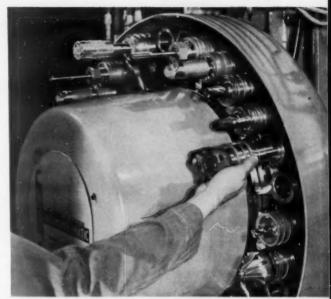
The tool changing magazine stores the many other tools required in addition to milling cutters for complete manufacture of a part without moving the workpiece onto different machines.
